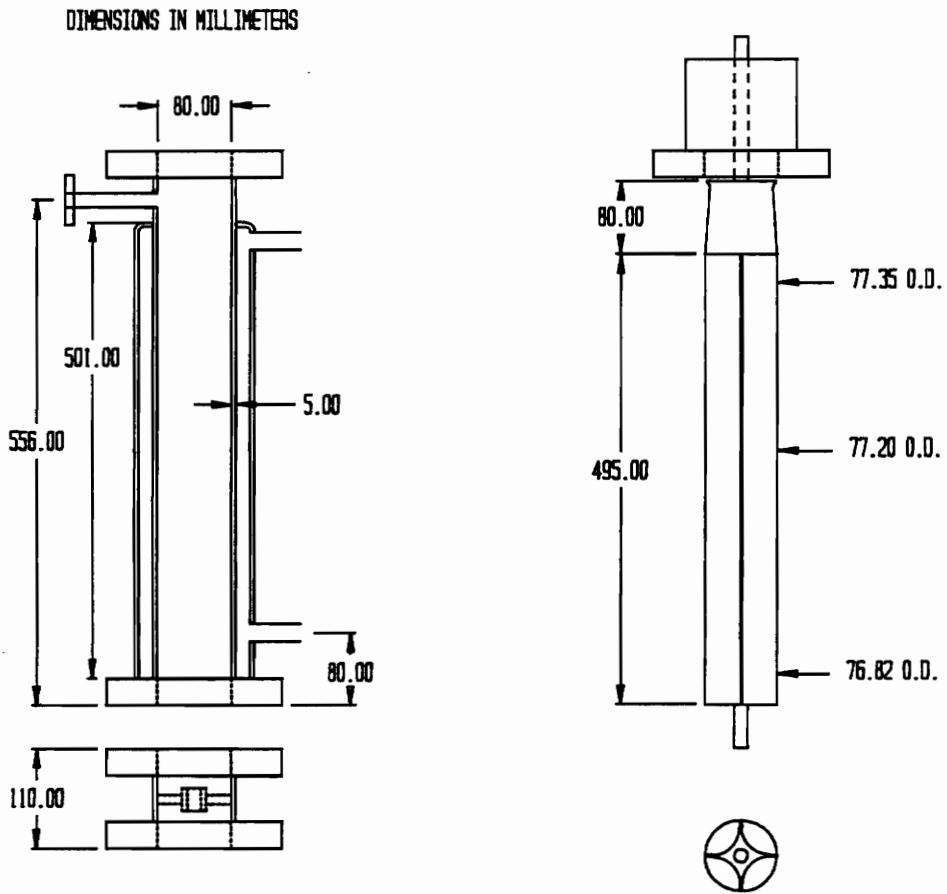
The critical dimensions of the experimental thin-film processor shown in millimeters.
